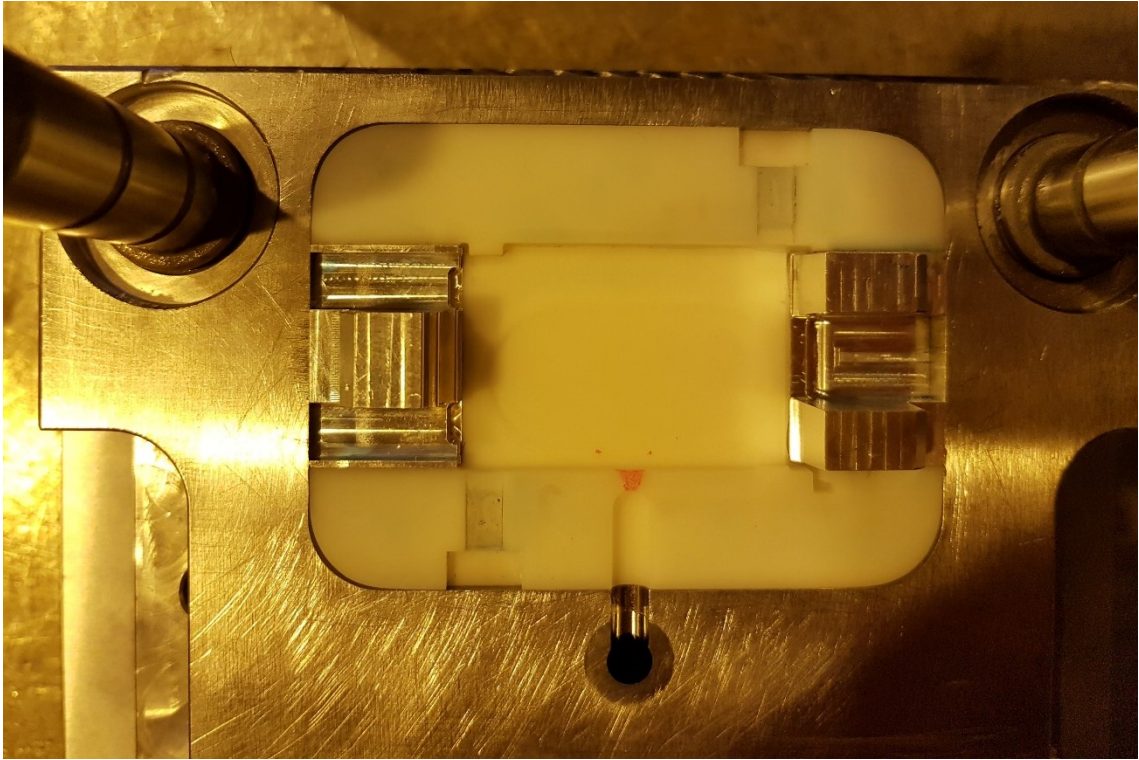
Cavity insert with machined aluminium inserts in problematic shut off areas. No visible damage to the AM insert.
